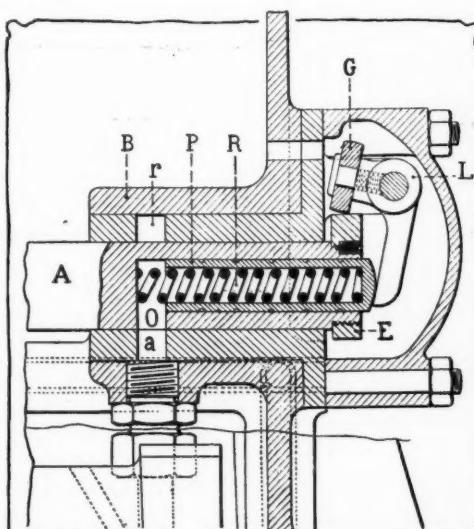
Oil pump arranged in the end of the camshaft of sleeve-valve motor
